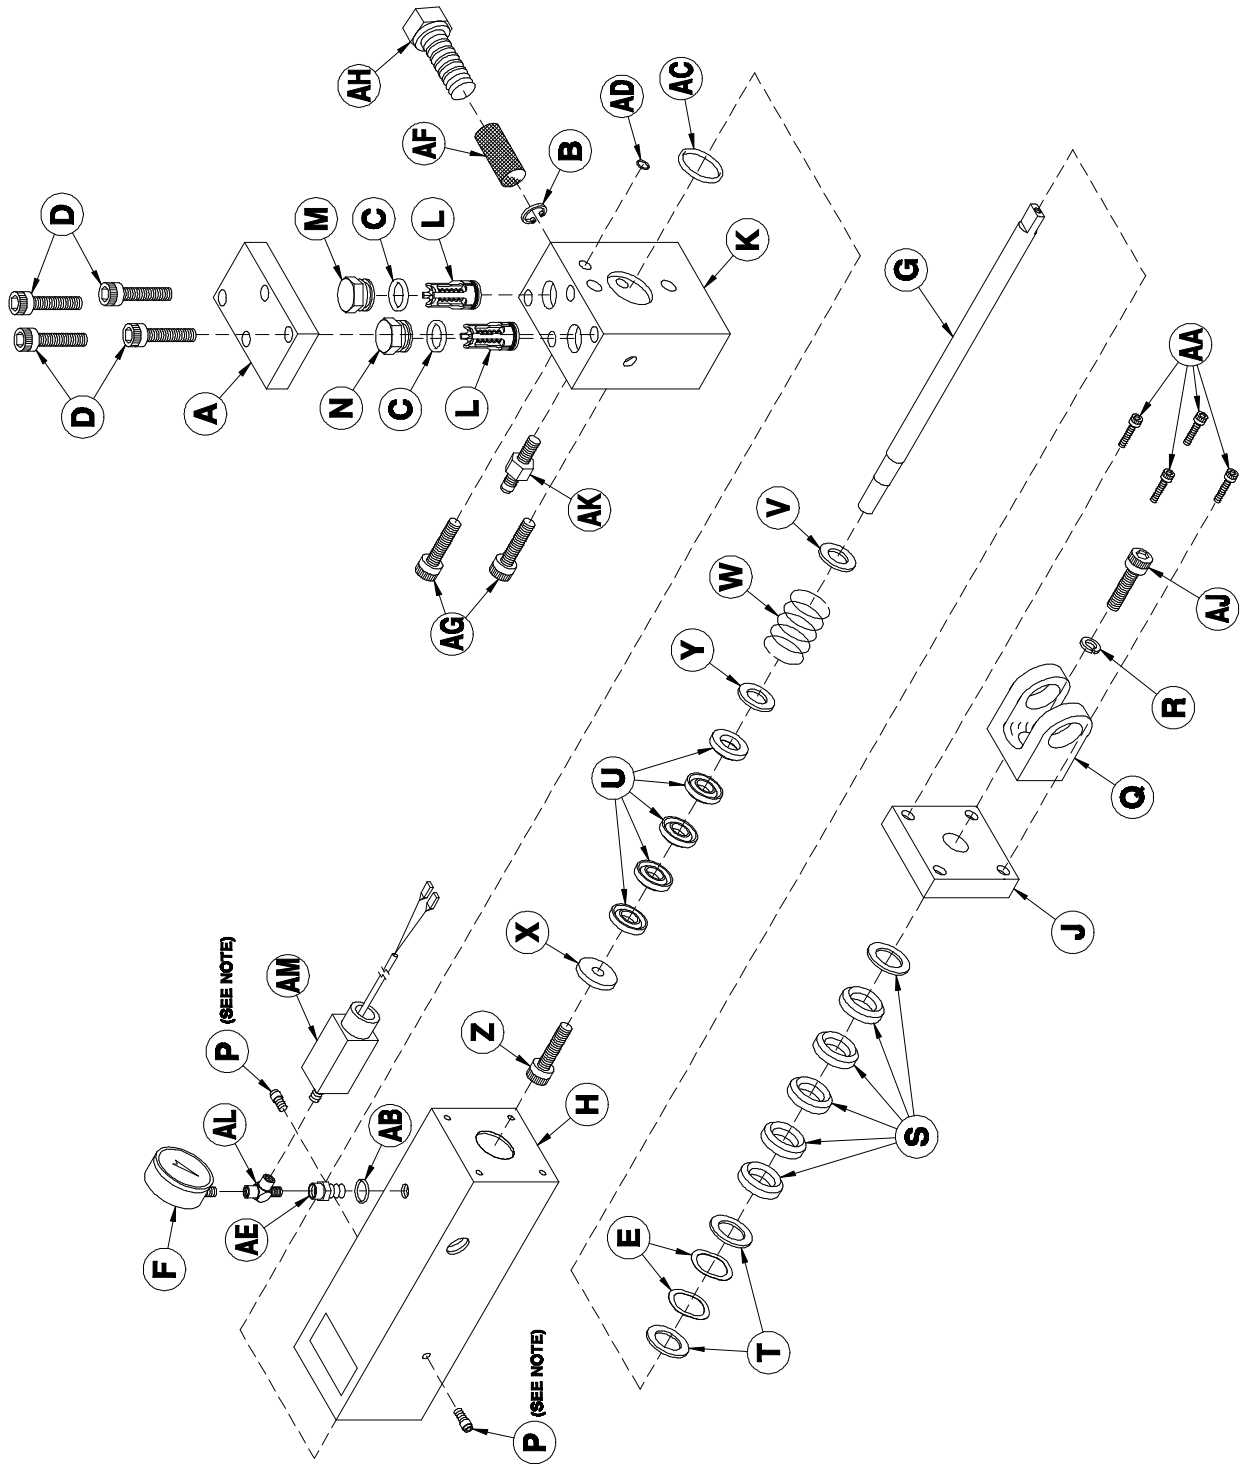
Auxiliary Pump Retro-Fit Kit (Part No. 15840-SIZE) Exploded View
